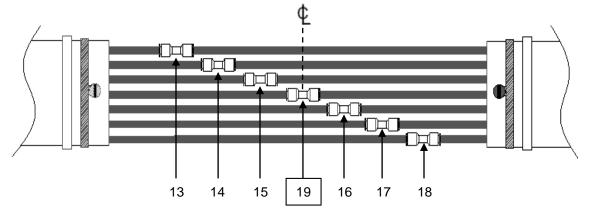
Couple Tube 19 in Center of Strip Length Dimension
